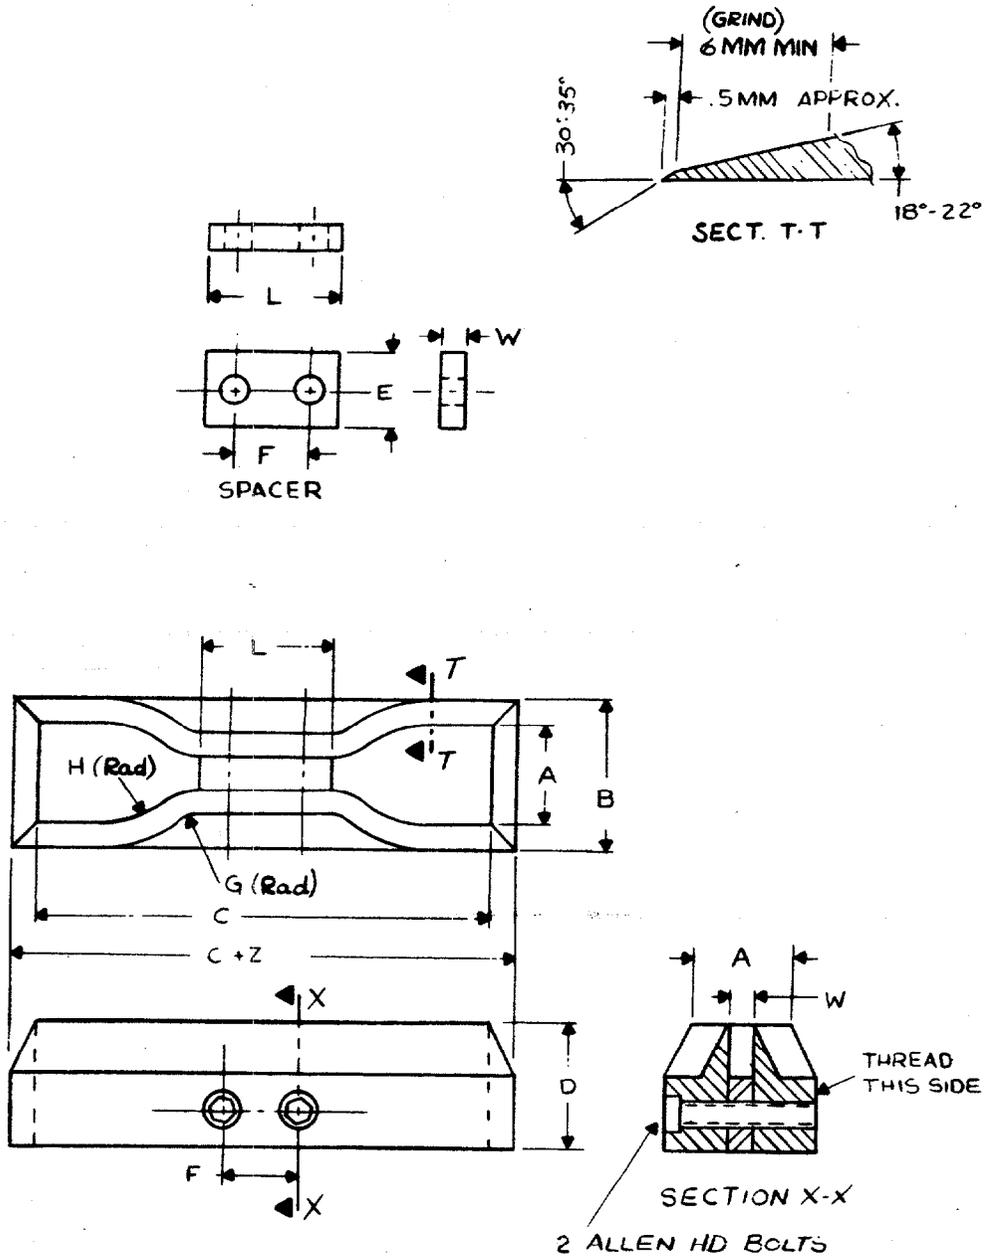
Standard Dies for Cutting Dumbbell Specimens
